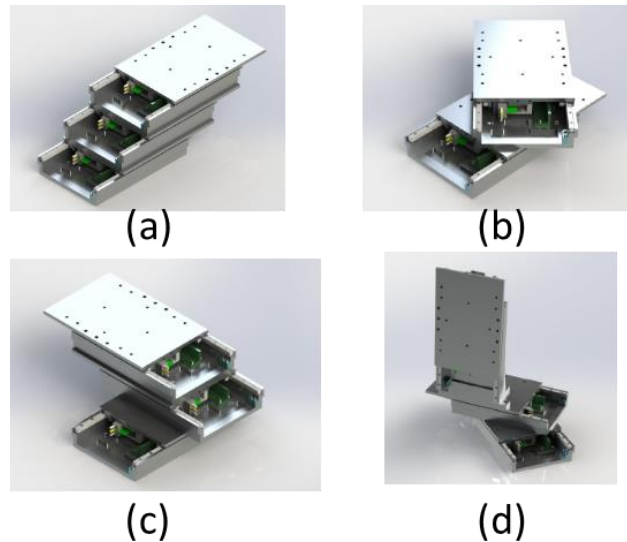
Possible assembly configurations of single-axis sliders: (a) Range extension by cascaded assembly, (b) Oblique assembly due to range and rigidity concerns, (c) Range extension in one axis, (d) Three dimensional oblique assembly
